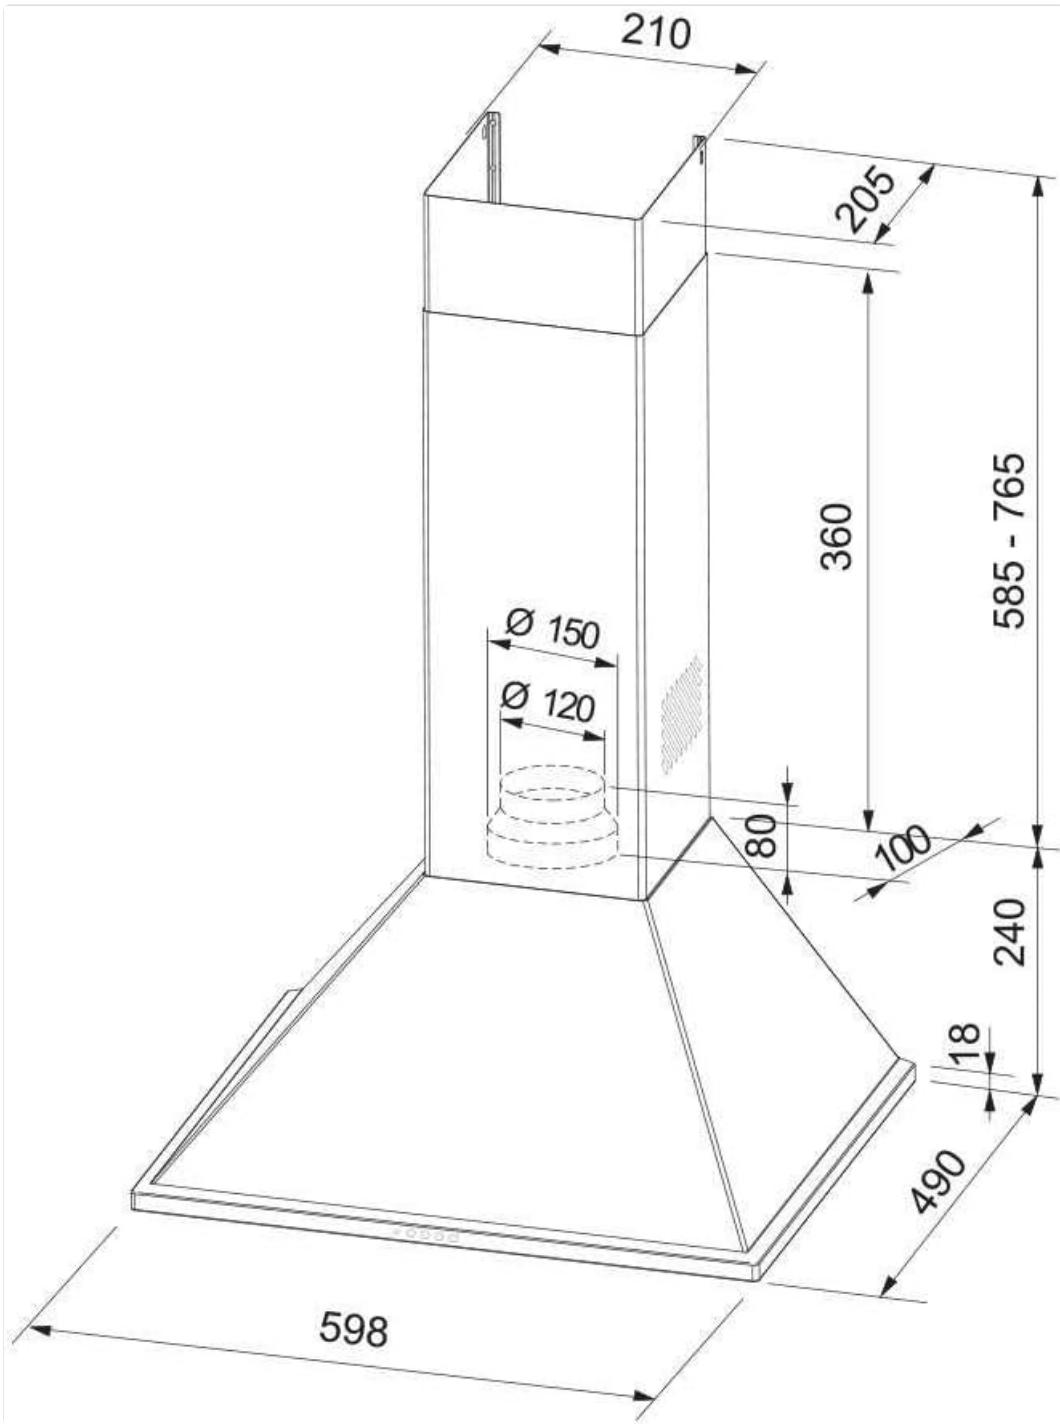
Technical drawing illustrating the dimensions of the Franke FDL 664 XS hood. Dimensions are provided in centimeters, showing height, width, depth, and ducting options (120mm and 150mm diameter).
